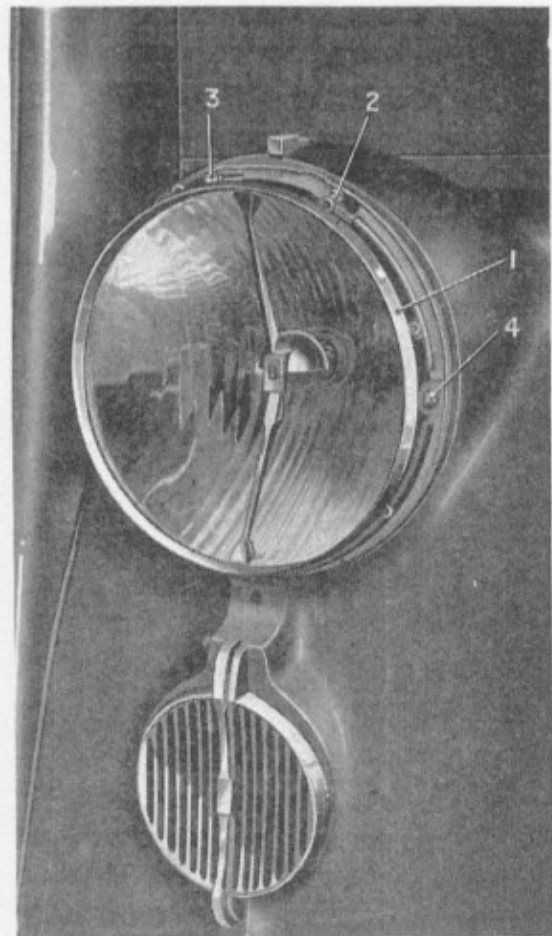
HEADLAMP—WITH RIM REMOVED.
